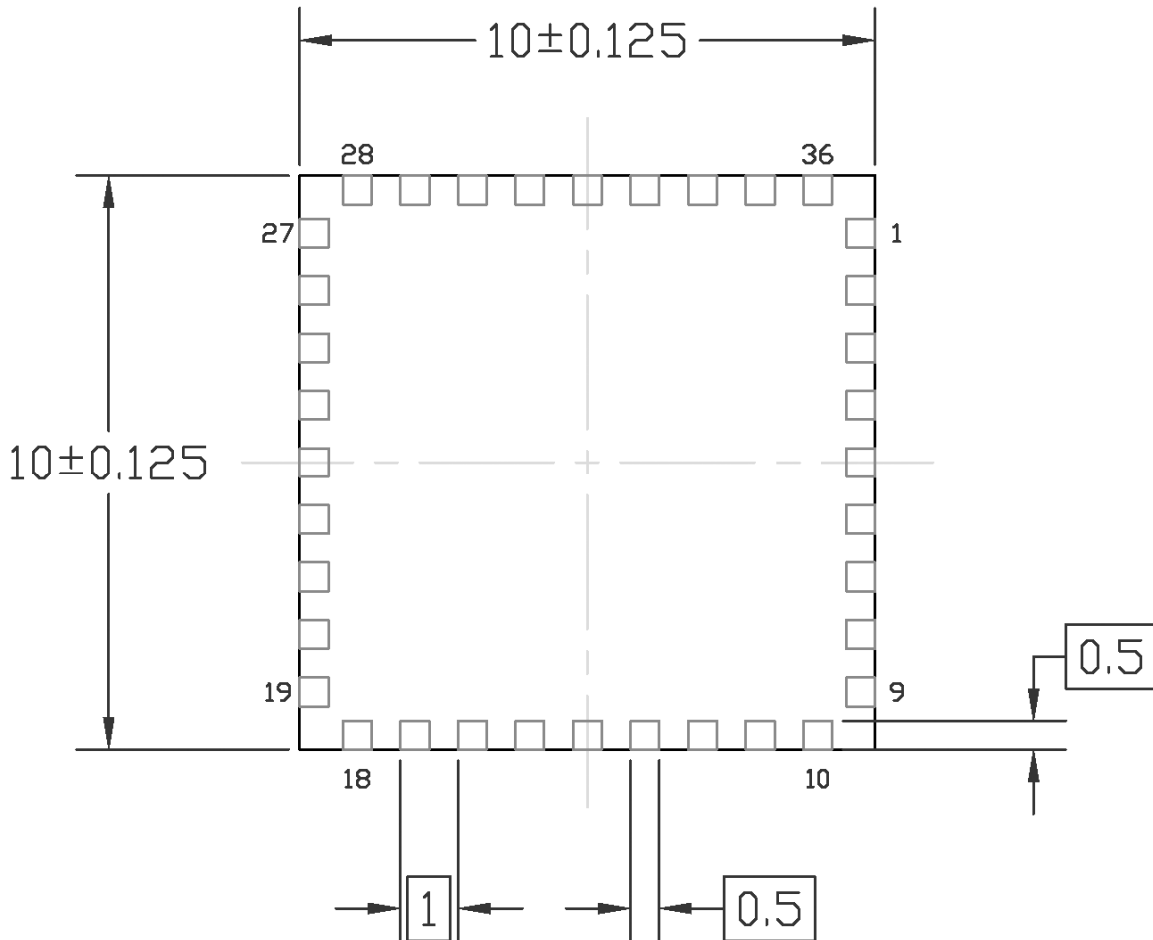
Recommended PCB Footprint (in mm) – Top View
